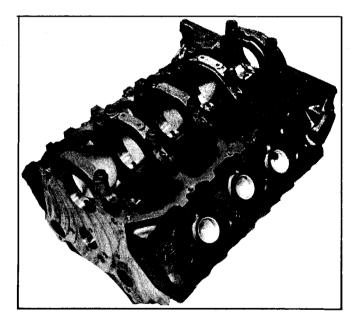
Cylinder Block - 455 H.O. Engine
